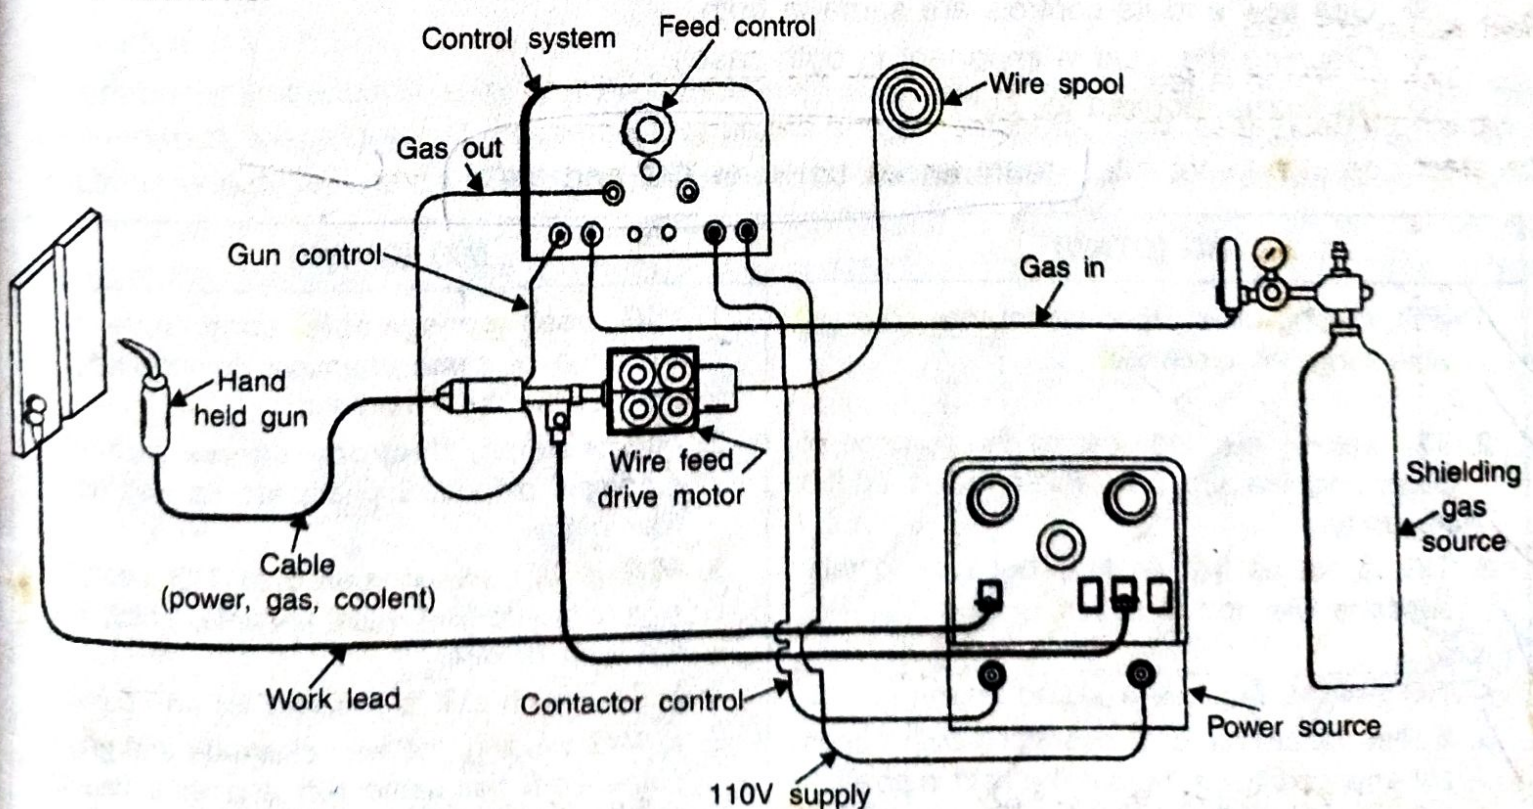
Equipment Needed For MIG Welding.
